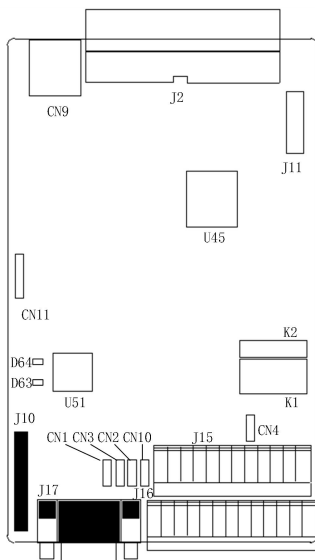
Wiring terminal and connector layout diagram of the main control board (front view)
